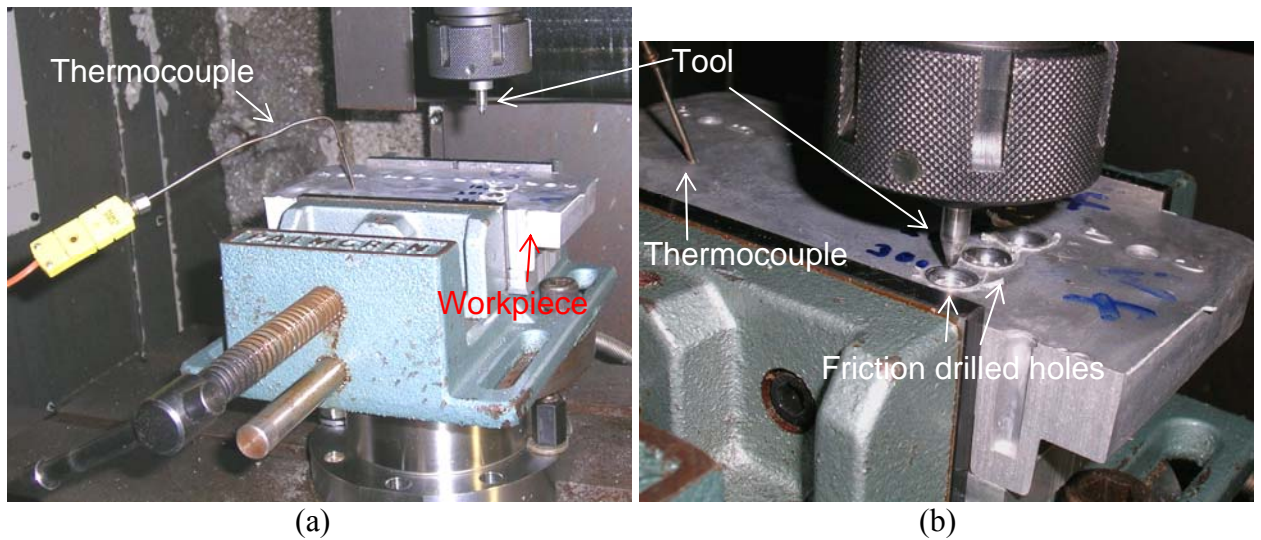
Experimental setup with tool, workpiece, vise, thermocouple, and drilled holes: (a) overview and (b) close-up view.
